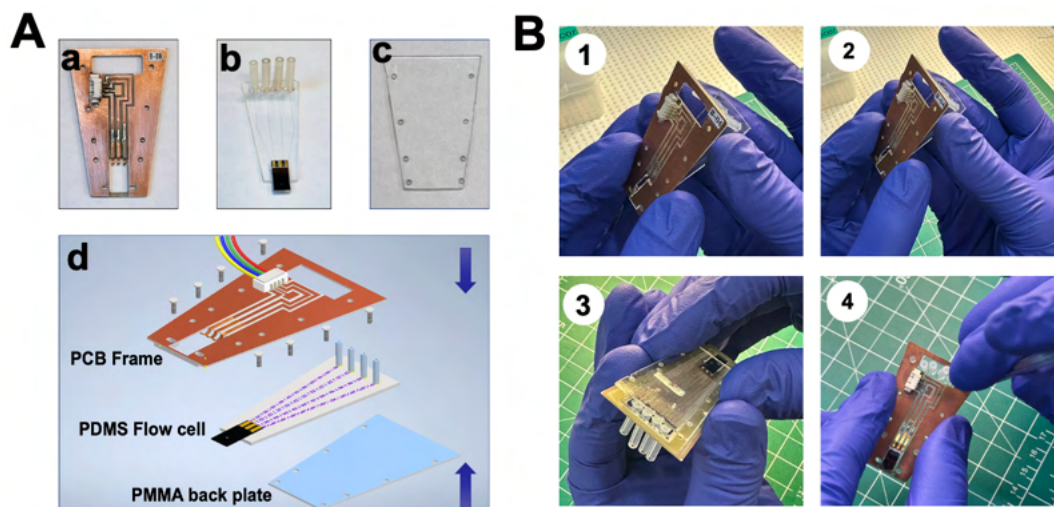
(A) Components and assembly of the *in-situ* flow electrochemistry device. a) Fabricated PCB, b) Microfluidic cell bonded to microchips (E and F), c) PMMA back plate, and d) cartoon drawing of the *in-situ* device assembly. (B) Photographs showing the assembly steps of the *in-situ* device.
